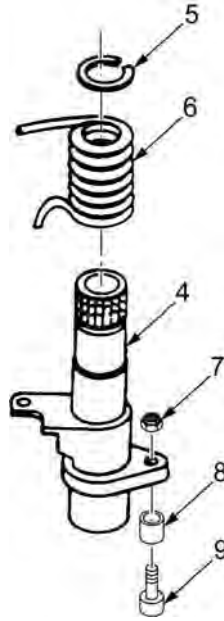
Right Brake Apply Cam Shaft Disassembly.
